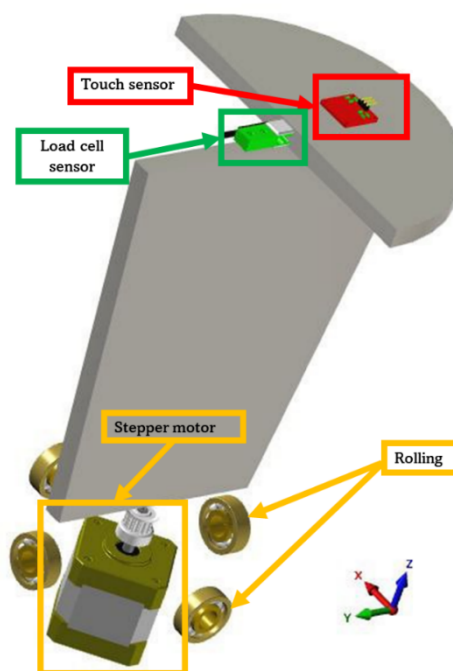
figure showing the inside of the machine and the emplacement of essential electronic components.
